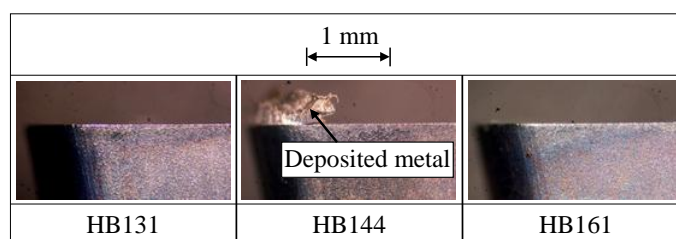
Appearances of deposited metal (SCM415 M34, MQL, cutting speed: 117 m/min, cutting length of groove: 0.5 m)
